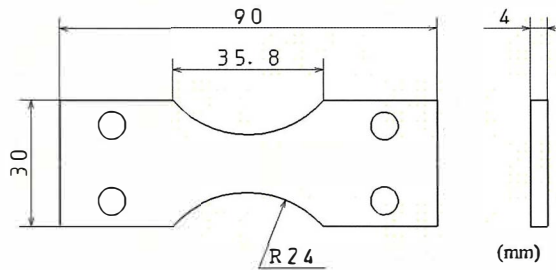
Shape and dimensions of plane bending fatigue test piece.
